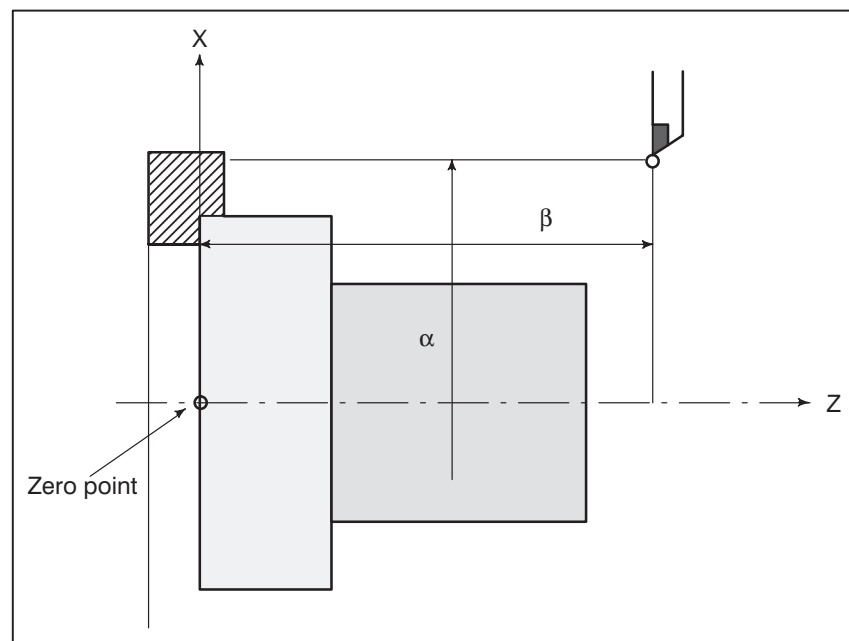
Tool Position Specified by  $X\alpha Z\beta$
